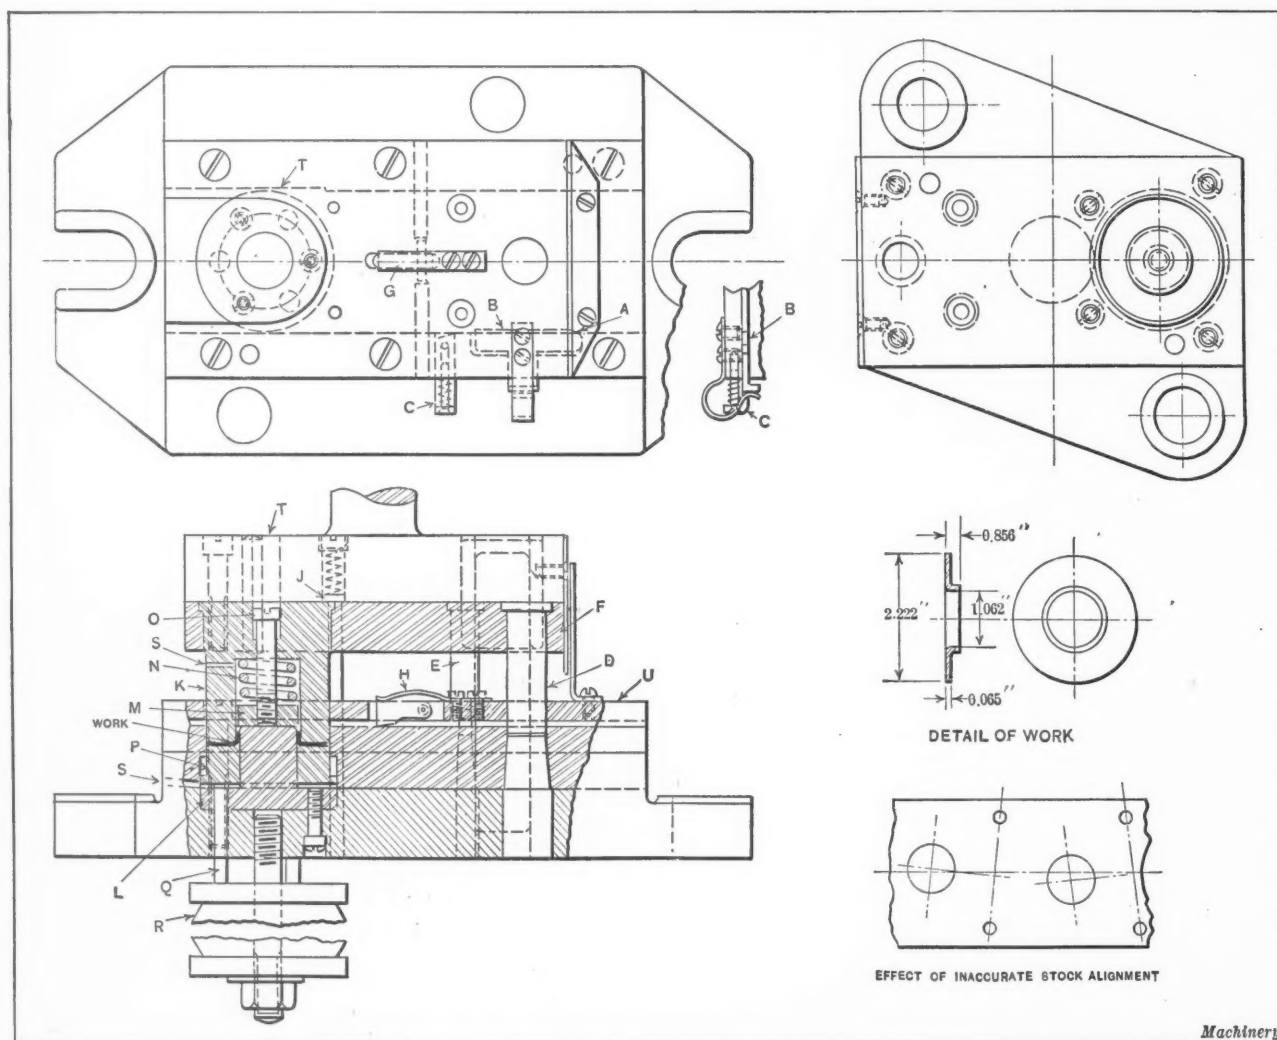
Piercing, Flanging, and Forming Die used in the Production of Automobile Bearing Adapters
